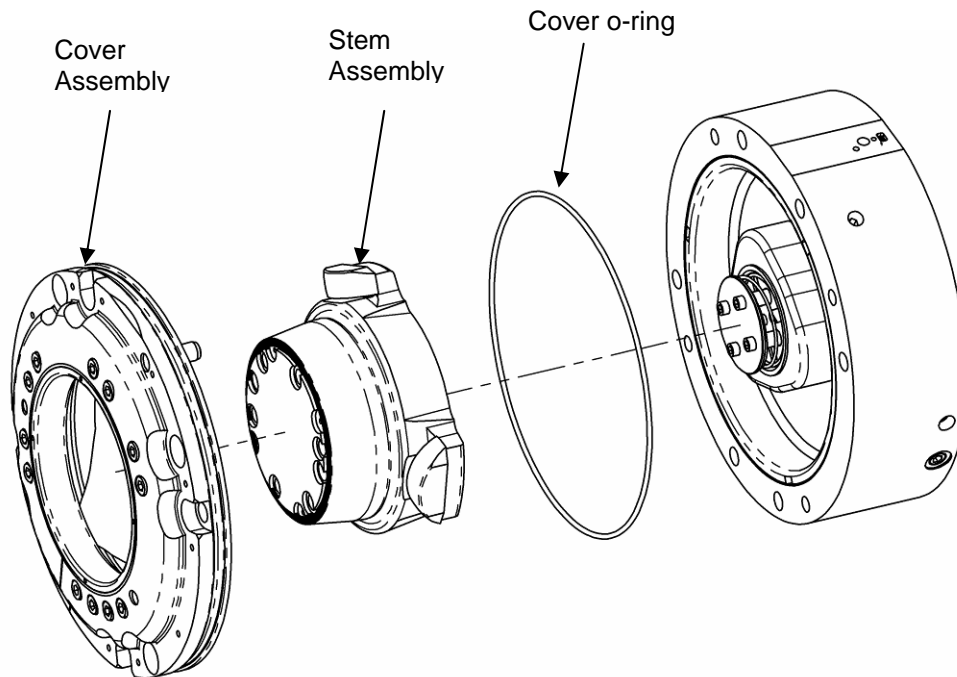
Removal of Cover Plate, Stem Assembly, and O-ring
